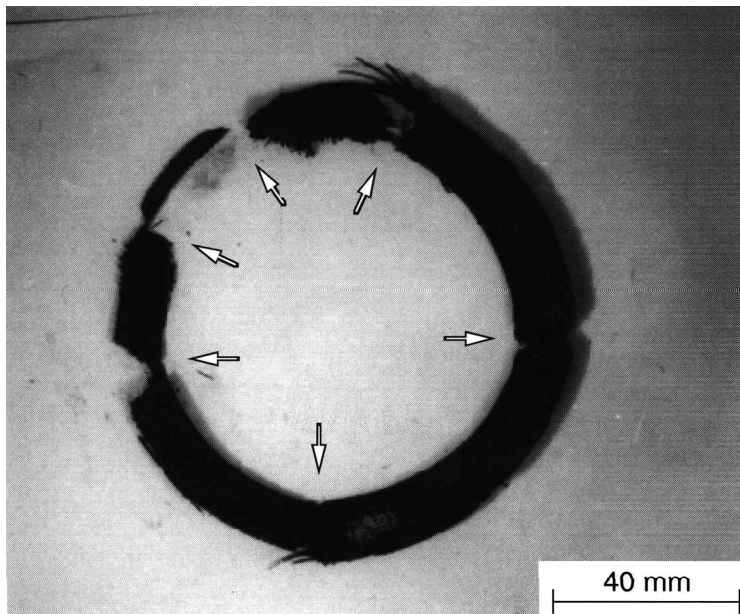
Fracture appearance of Disk A after total fracture at peripheral speed of 516 m/s at outer radius. Arrows indicate the boundaries of the fractured sections.
